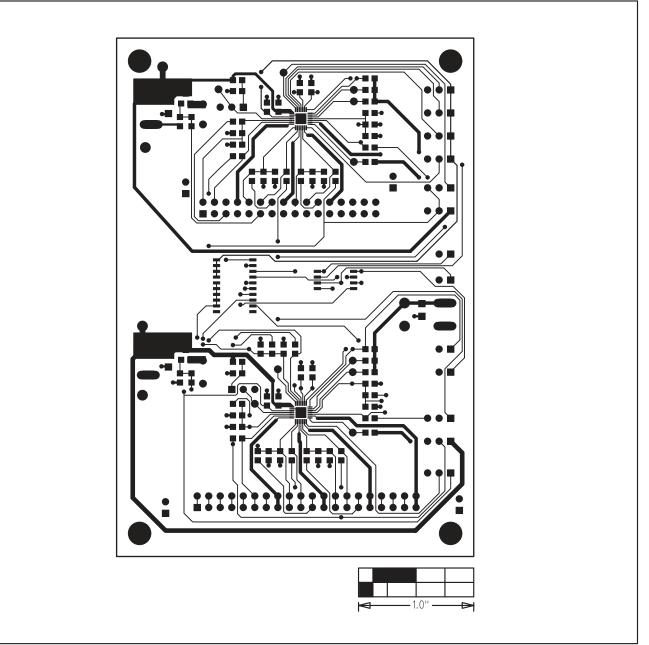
MAX16050 EV Kit PCB Layout—Component Side
